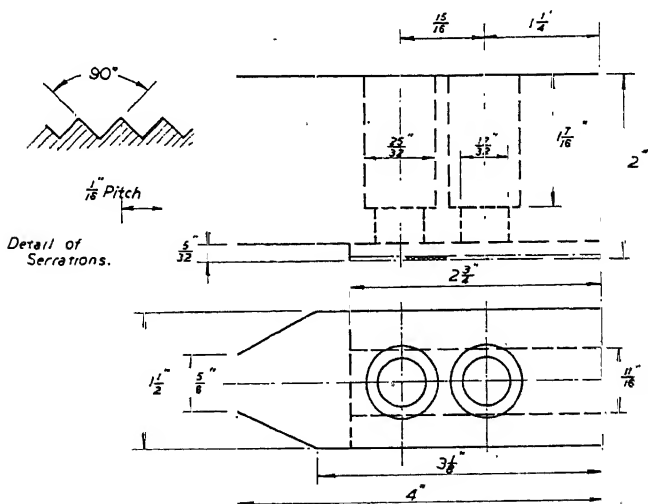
Soft jaw blanks for Tudor 3-jaw chuck (with replaceable jaws). 12 in.
